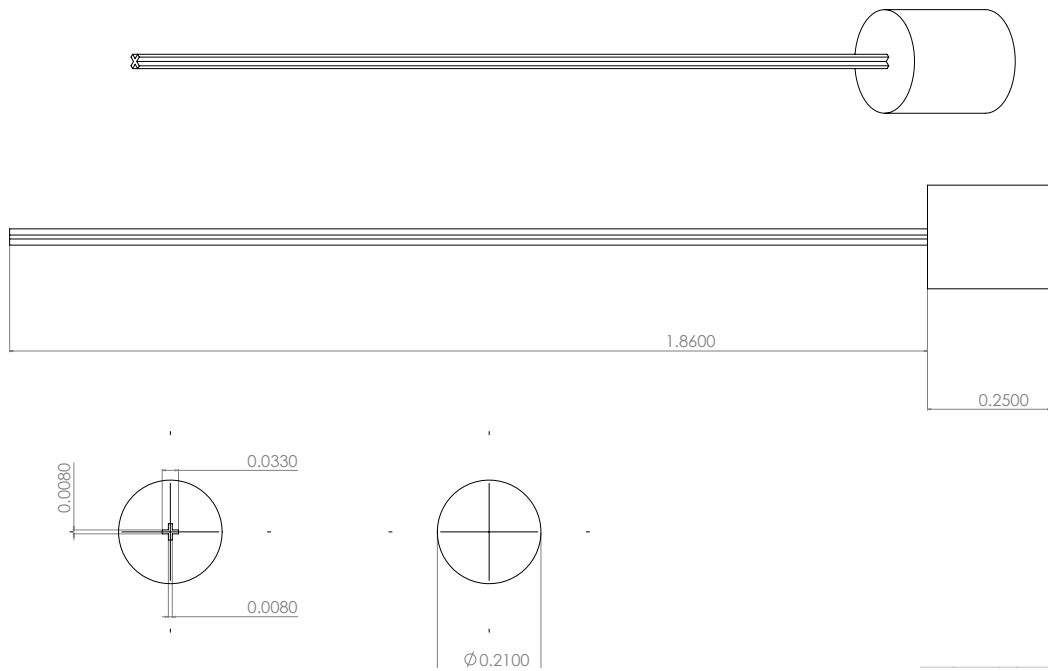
SolidWorks drawing for the cross shaped extension rod.
